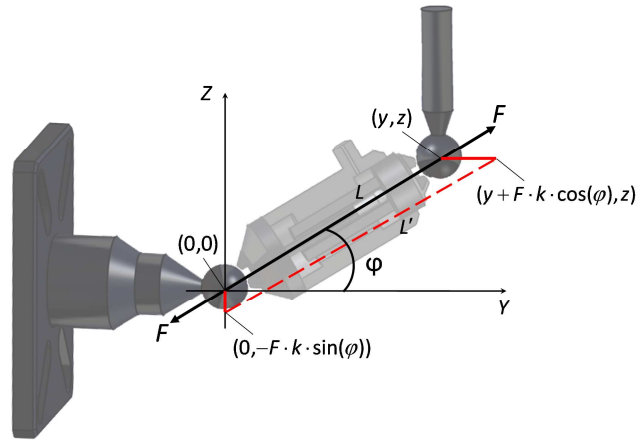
Horizontal machine tool: deflection in spindle and table joint during measurement in Y-Z plane
